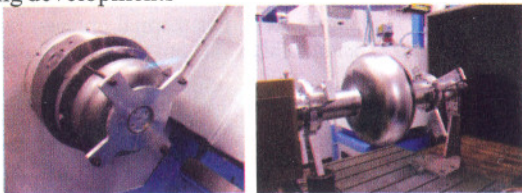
The stage wise preparations for cavity fabrication for (a) machining and (b) electron beam welding.
